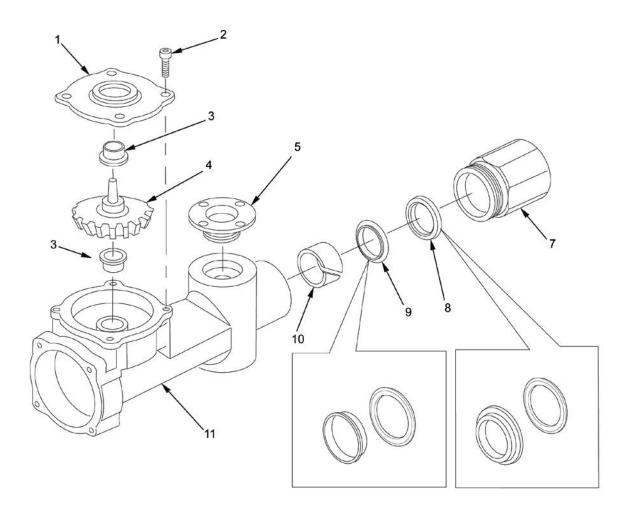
Mechanical Housing (Upper) 13015620 and Round Plain Nut 13015630.
